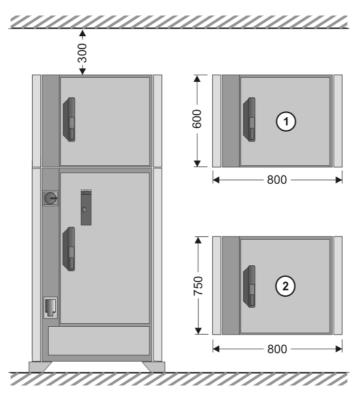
Minimum clearances with top-mounted / technology cabinet
